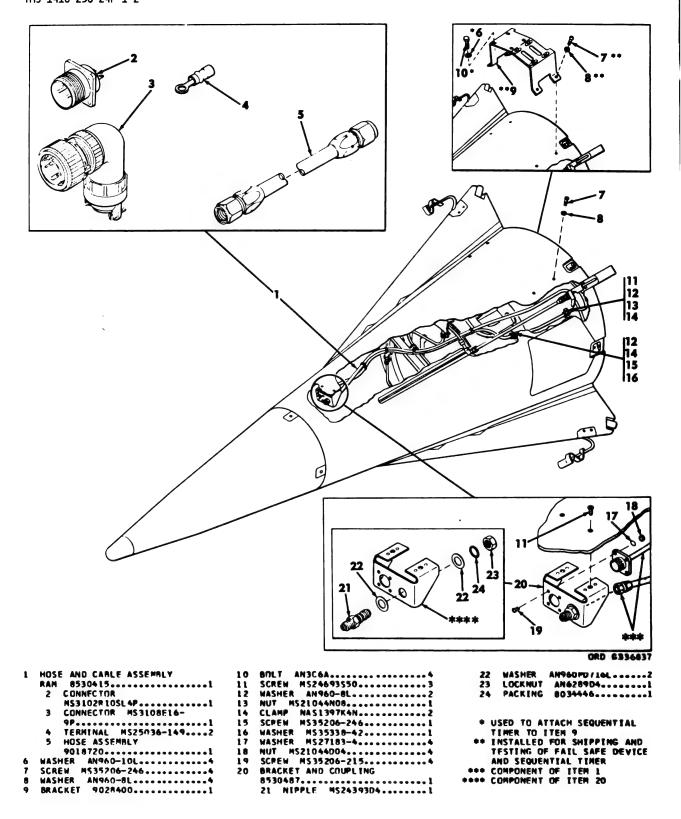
EQUIPMENT INSTALLATION, FOWARD BODY ASSEMBLY /9020575 AND 9979613/
